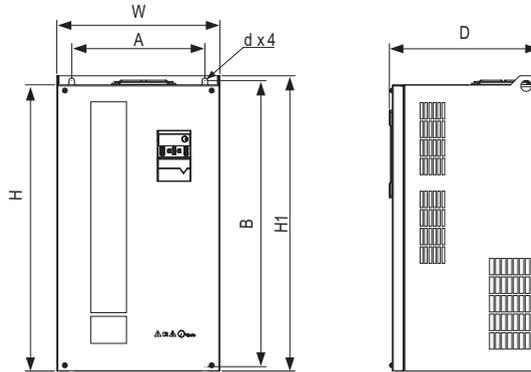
Overall and mounting dimensions of VDF750T30G(B) to VDF750T185G and VDF750-2T15GB to VDF750-2T55G
